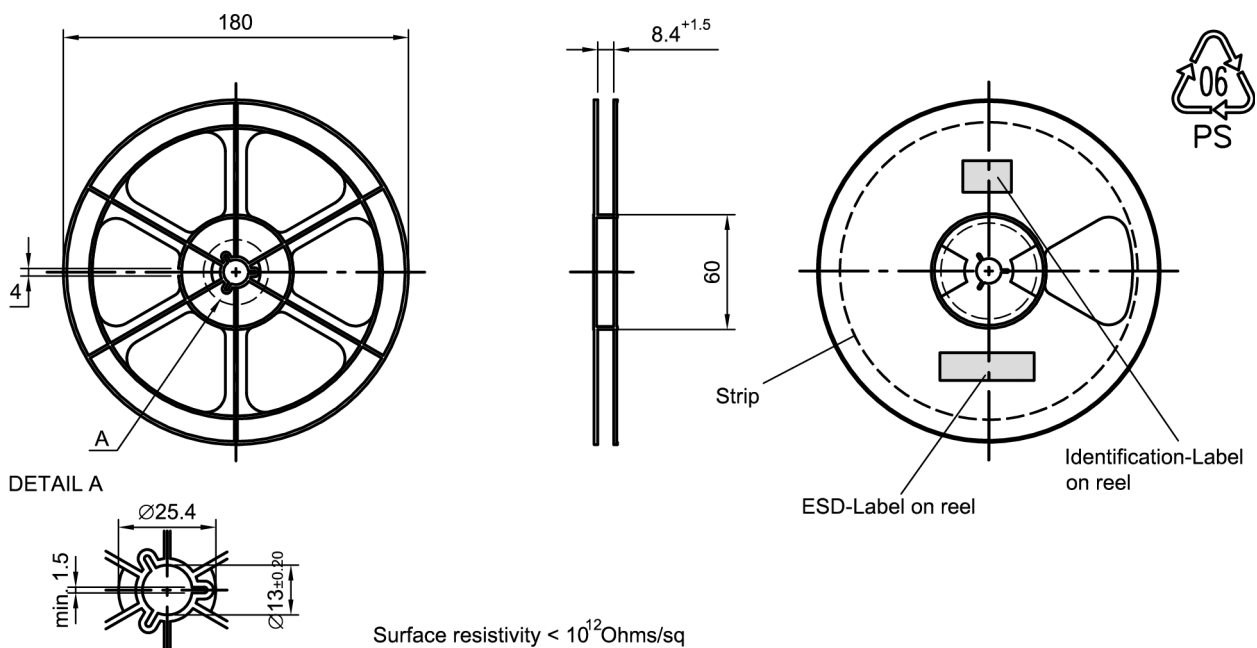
Drawing of reel (first-angle projection) with diameter of 180 mm.
